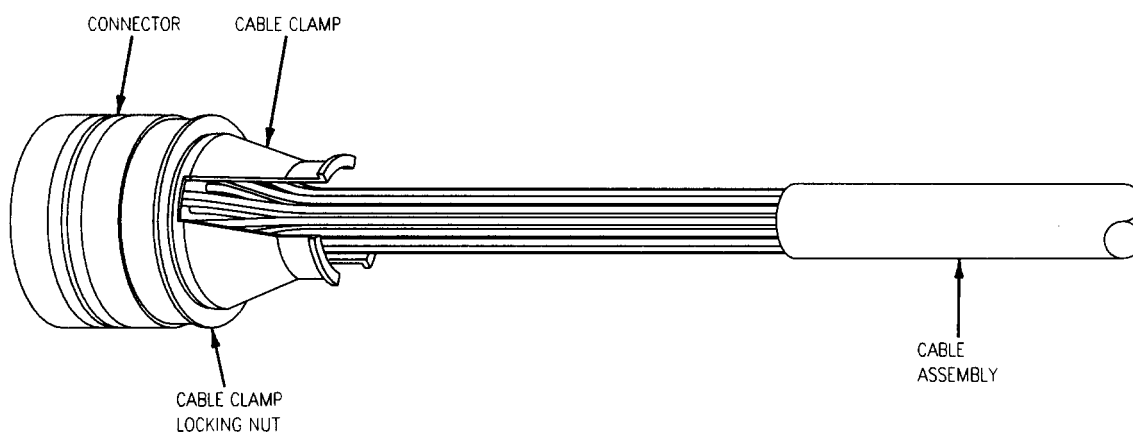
Installing Cable Clamp and Cable Clamp Locking Nut
